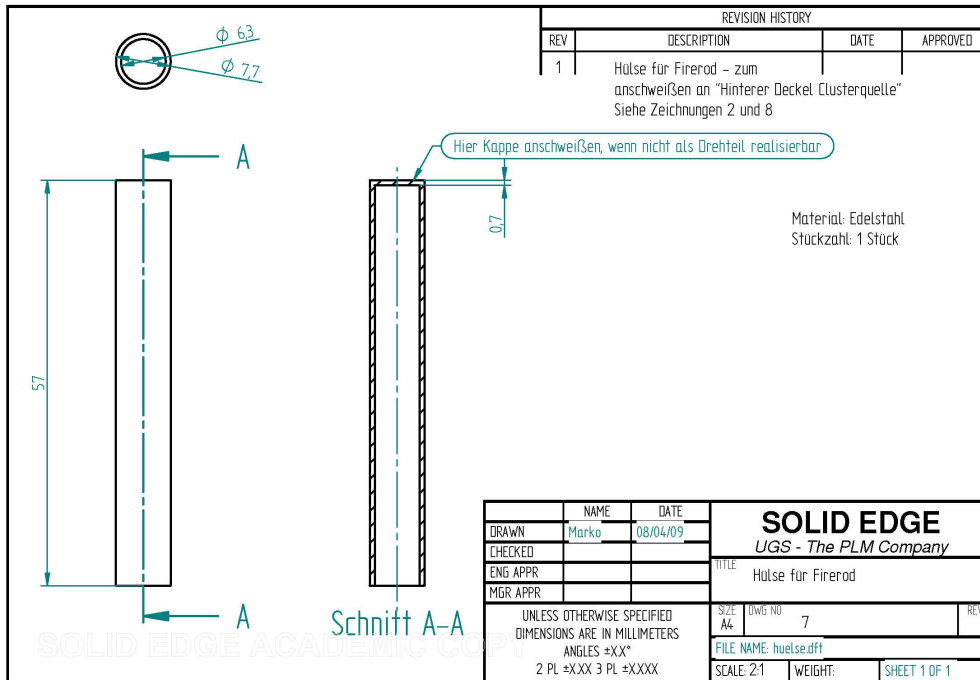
Water cluster source, cone that holds the heater, welded into back lid.
